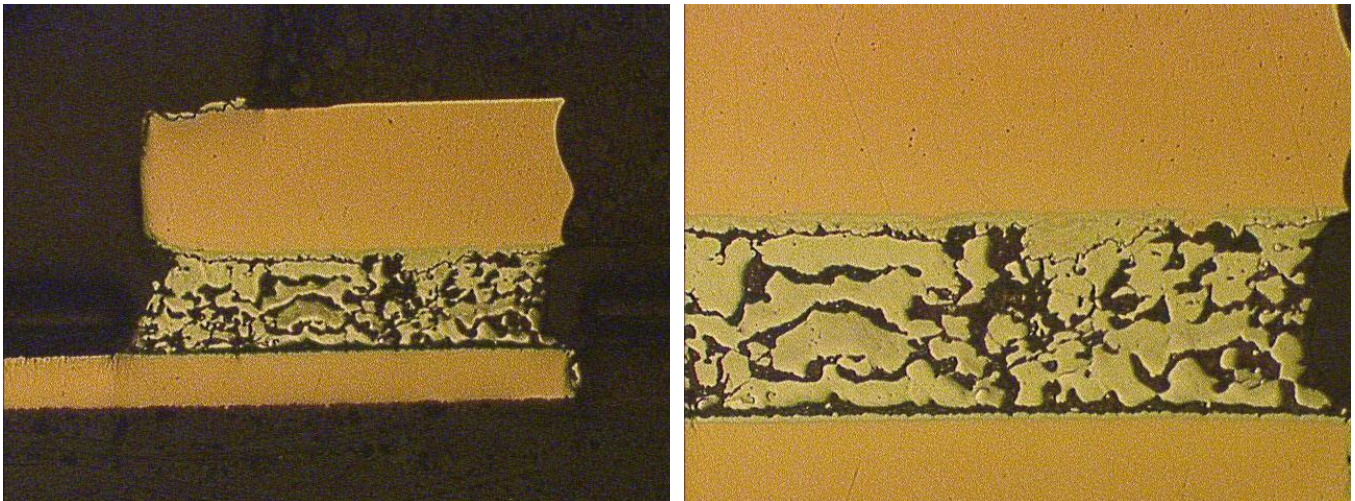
QFN-20 Solder Joints, Board 109, Component U28, SN100C/Sn, Reworked with Stencil Quik, 1 Rework, DNF
